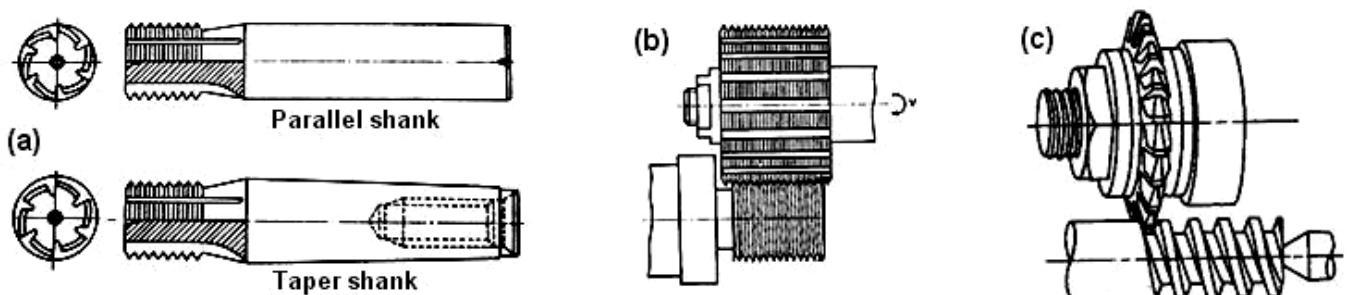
(a) Internal thread milling cutters (b) Short thread milling cutter (c) Long thread milling cutter
